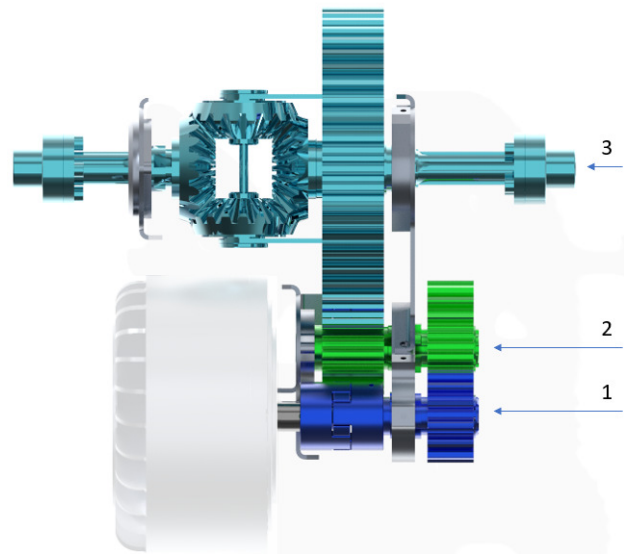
3D Model of the Fixed-gear Drive Module: Input- (1), Intermediate- (2), Differential Shaft (3) Assemblies
